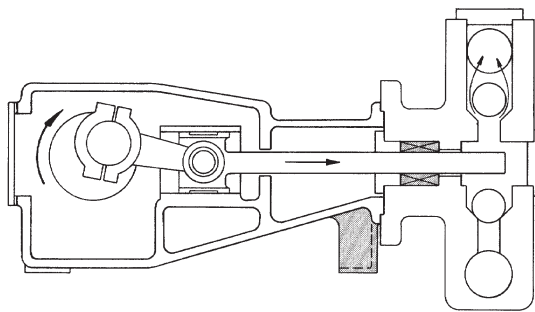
Horizontal Double-Acting Piston Power Pump
